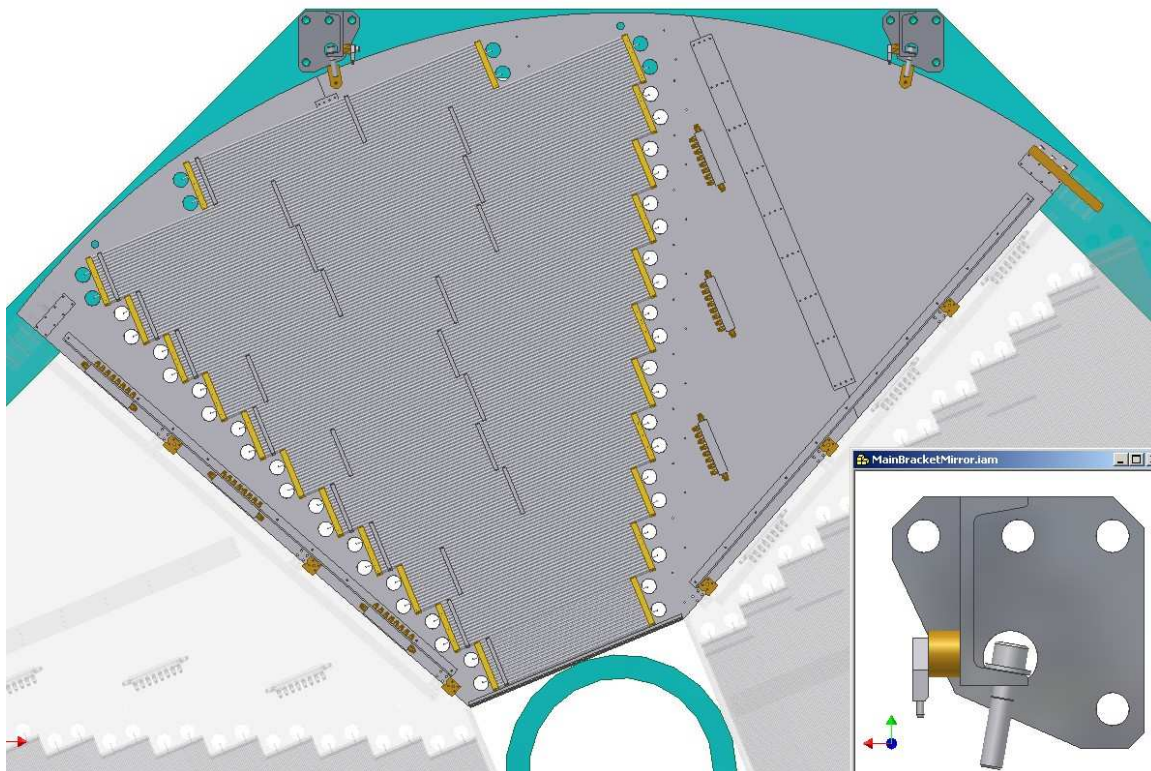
Details of the hanging brackets used to support the octant plate wheel assemblies.
